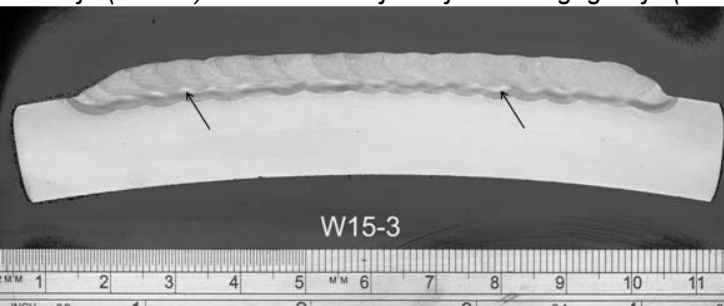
Macrosections taken through the samples relating to test weld W15. Scale ruler shown:
